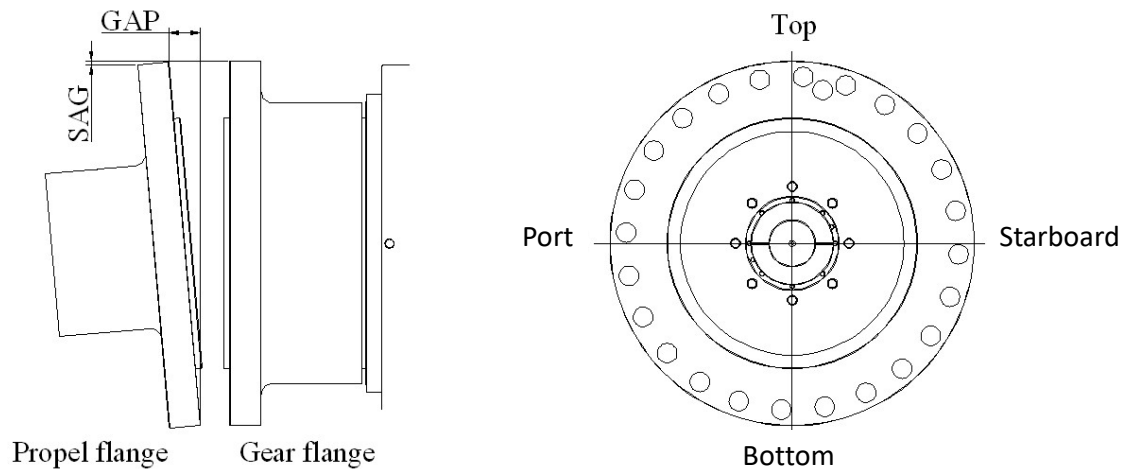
illustrates the gear's output flange with the propeller flange.
